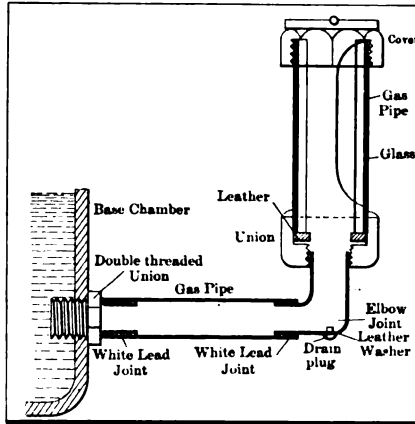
Method of making and attaching an oil level gauge to the base chamber with standard pipe fittings
